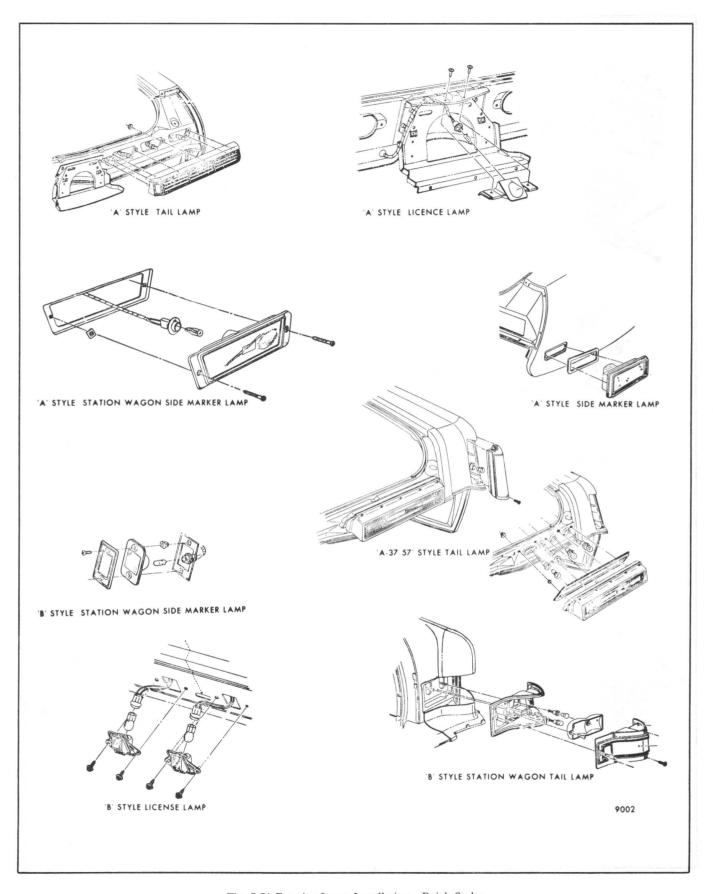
Exterior Lamp Installation - Buick Styles
